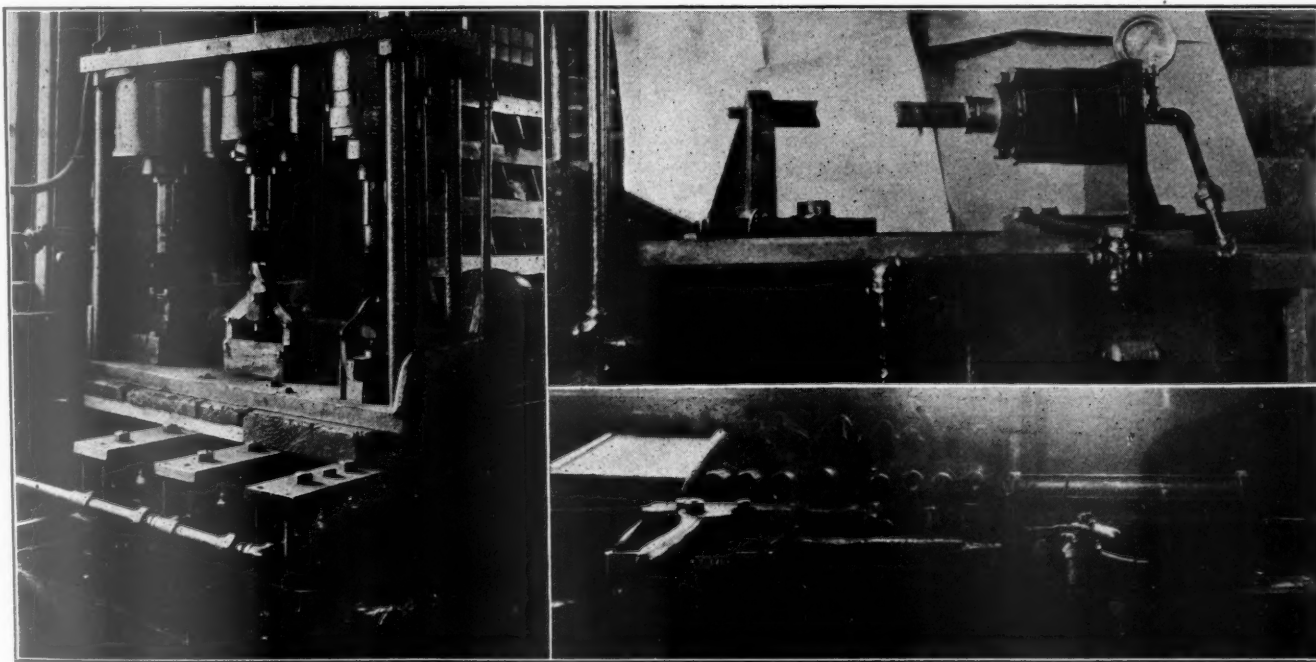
Left—Three station hose dismantling machine; Right top—Hose band clamping machine; Right bottom—Machine for forcing nipples into new hose
